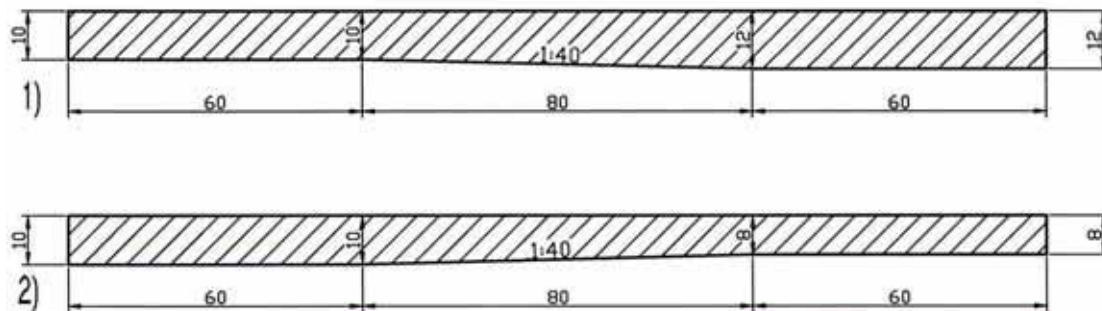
The cross-sections of the test pieces used in the welding tests. Above: (1) test piece 10D12. Below: (2) test piece 10D8.
